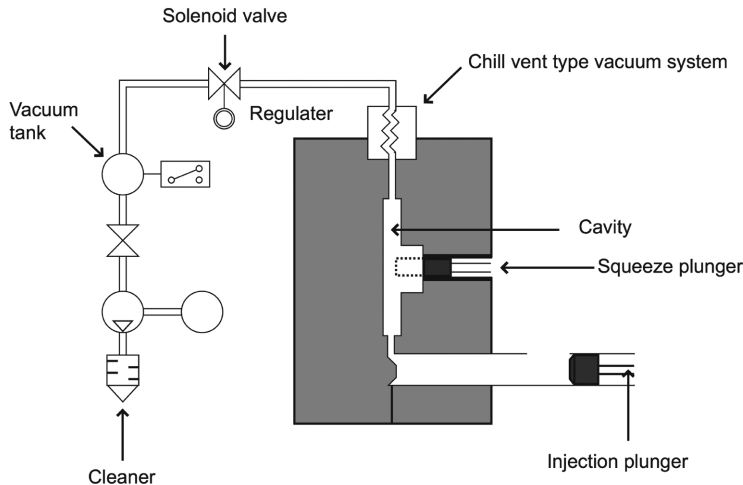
Schematic drawing of a partial squeeze and vacuum assisted HPDC machinery [Kim00].
